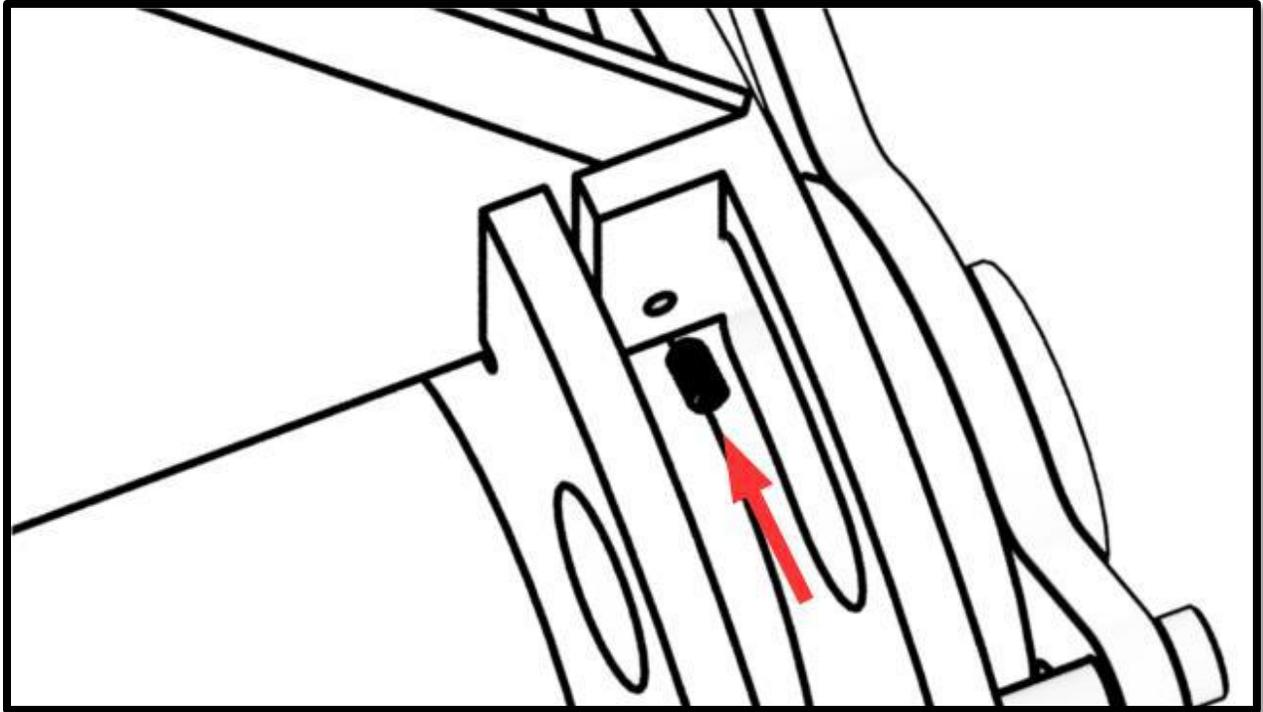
Installing the set screw to secure the fin inside the rear fin retainer.
